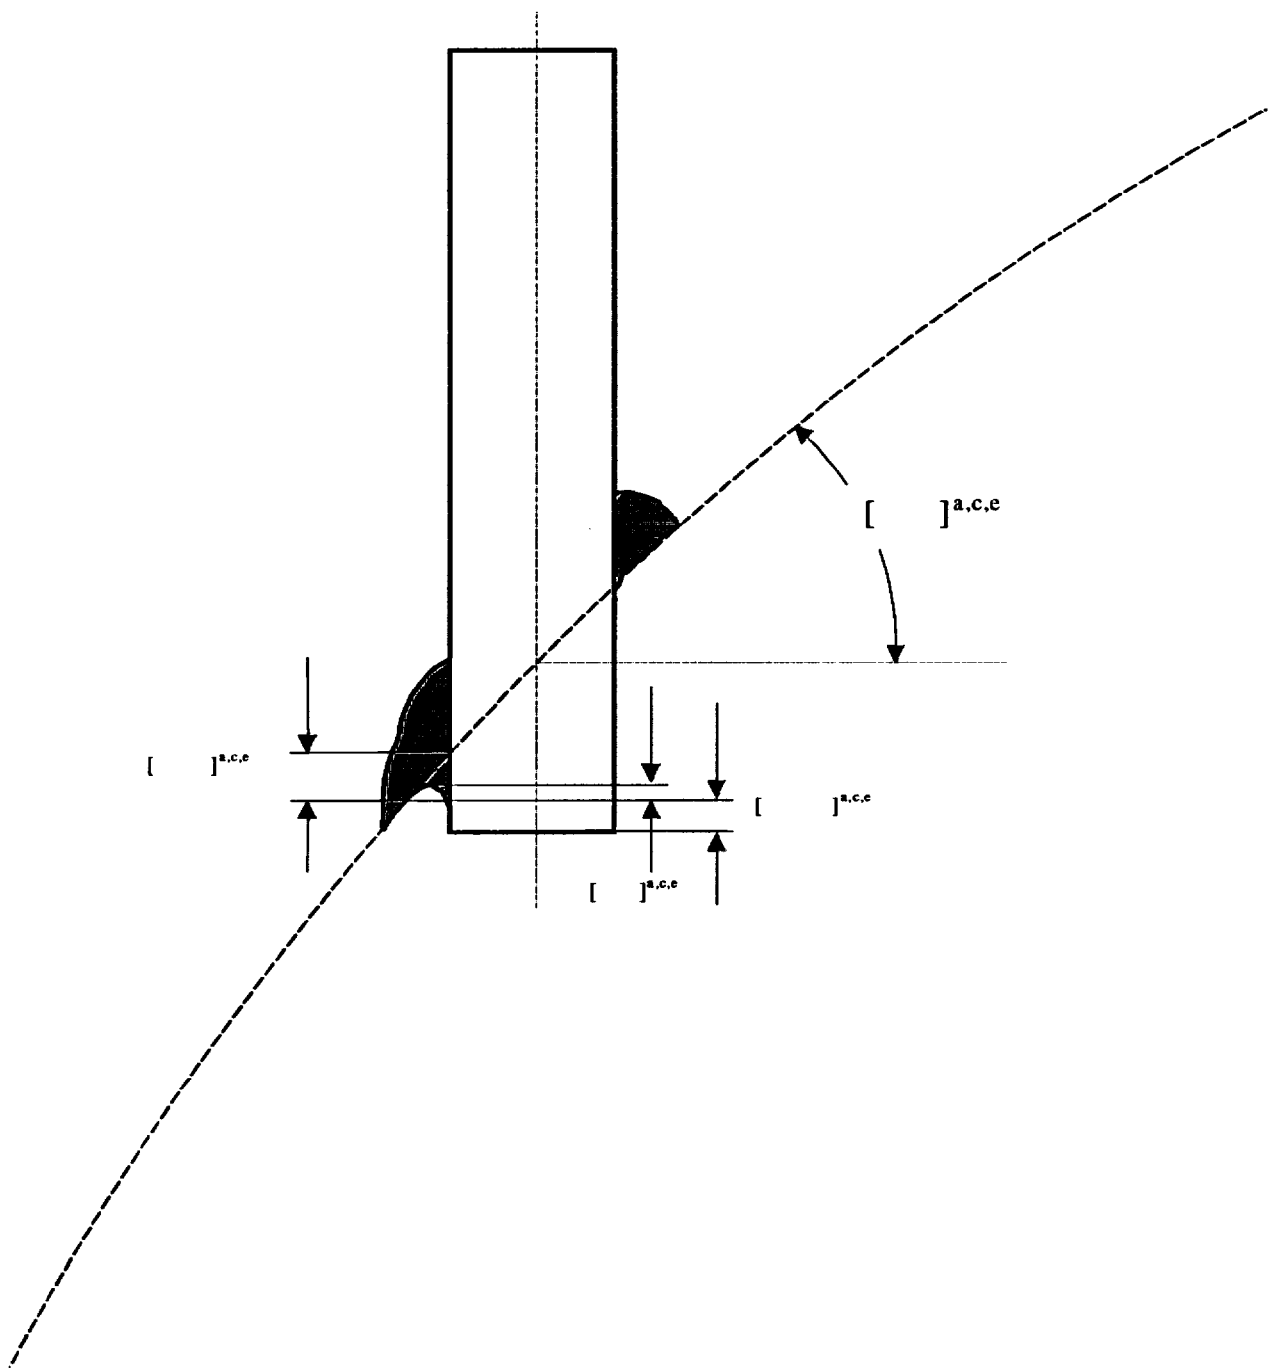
H.B. Robinson CRDM J-Weld Fillet Geometry for Penetration at  $[ ]^{a,c,e}$
